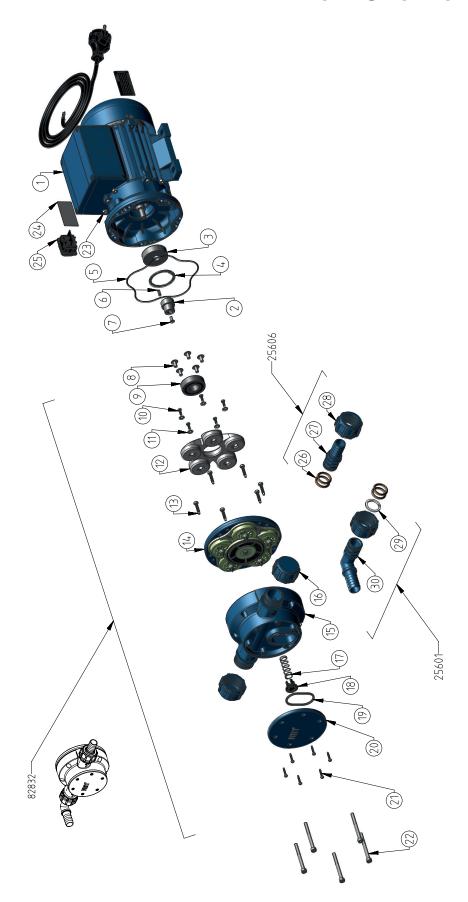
1: Exploded view of AdBlue® electric diaphragm pump
